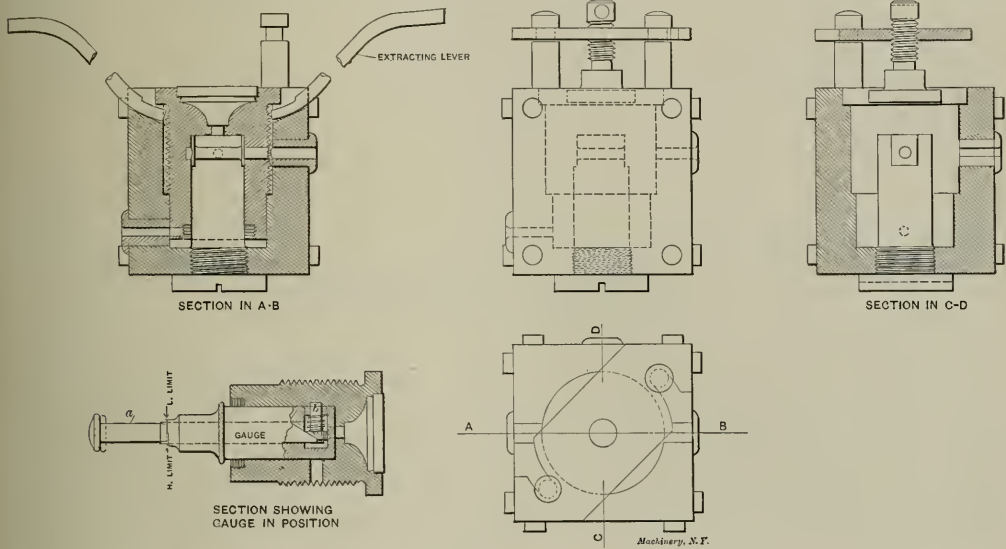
Jig for Drilling Percussion Fuse, and Gauge.
